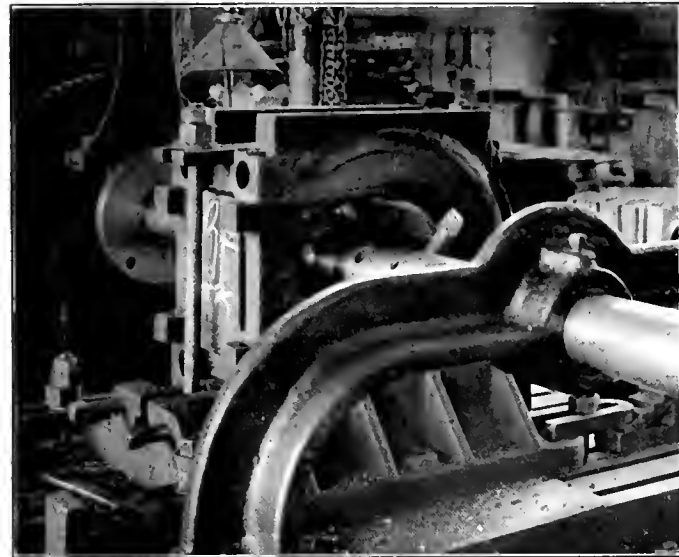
Boring the Brass on the Jig Shown in Fig. 9.
